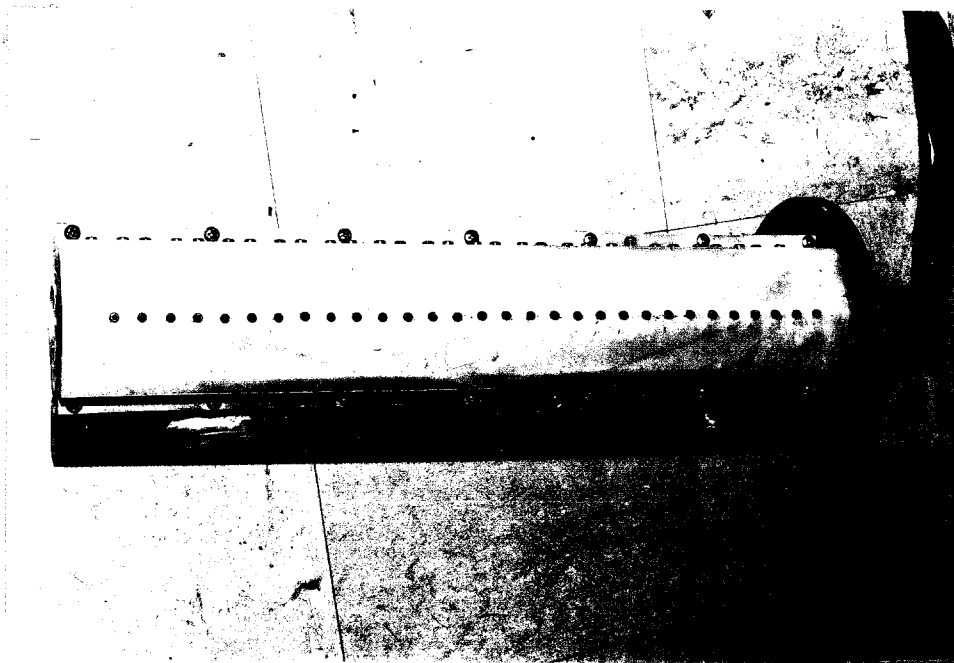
Drum with skin removed showing 14 screws holding plastic housing together.
